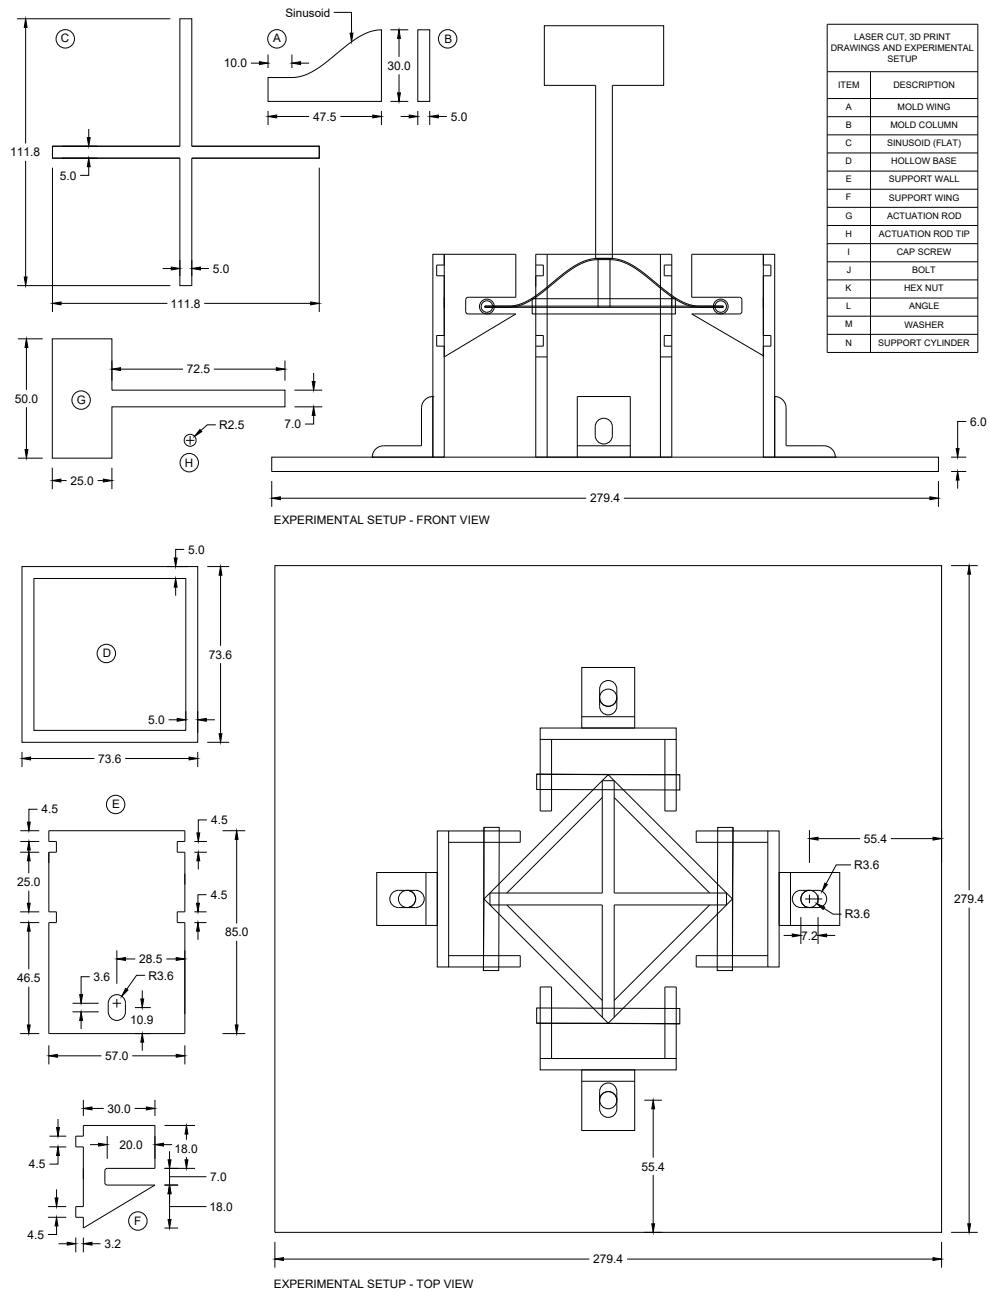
Details of laser cut, 3D printing and experimental setup. All dimensions are in millimeters.
